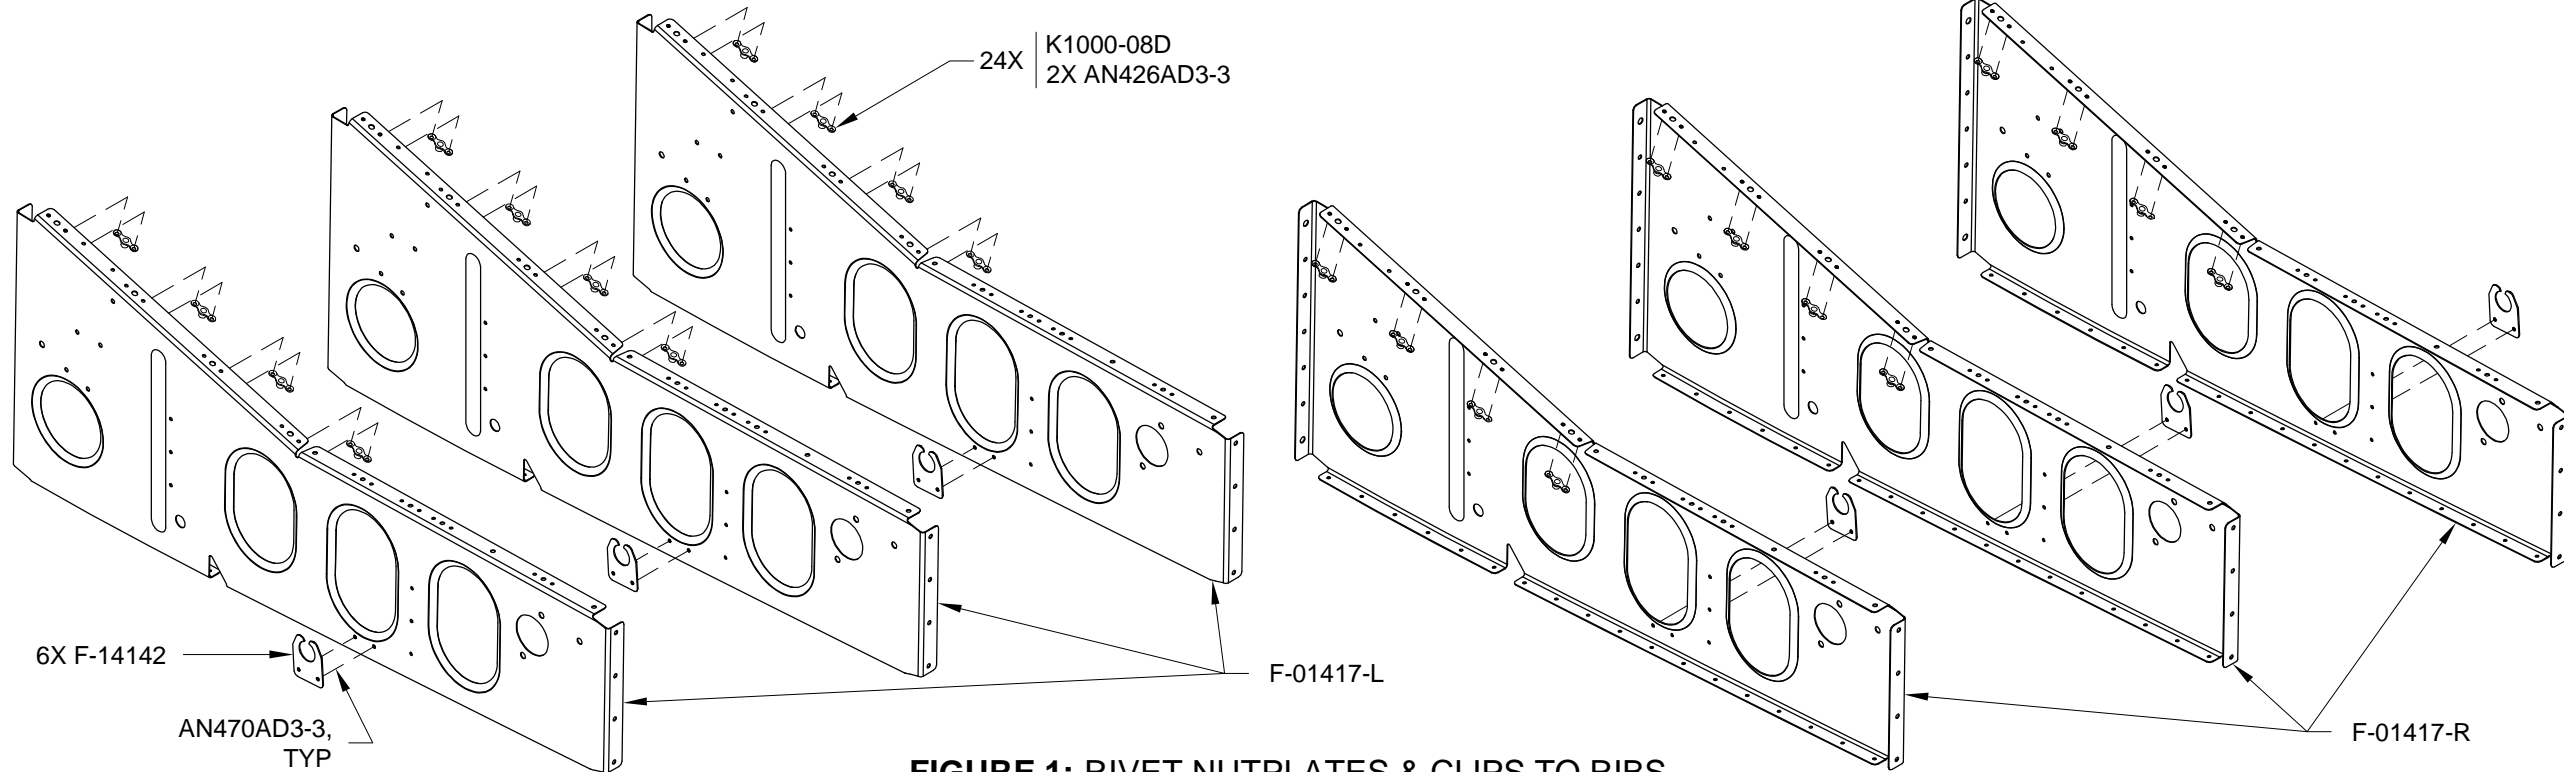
RIVET NUTPLATES & CLIPS TO RIBS
